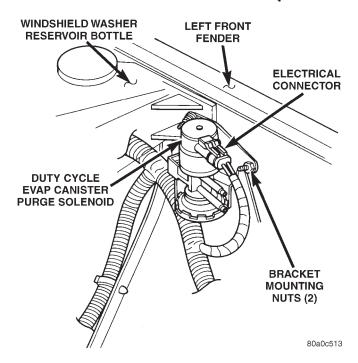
Duty Cycle EVAP Purge Solenoid Location CAUTION: Remove fuel tank filler tube cap before servicing any fuel system component. This is done to help relieve tank pressure.
